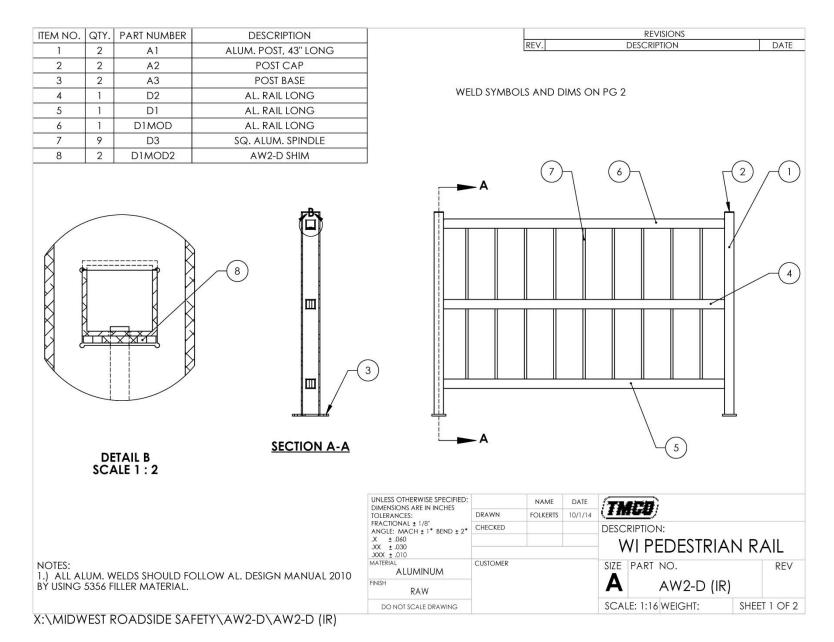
Fabrication Drawings, Test Nos. APR-1 and APR-2
